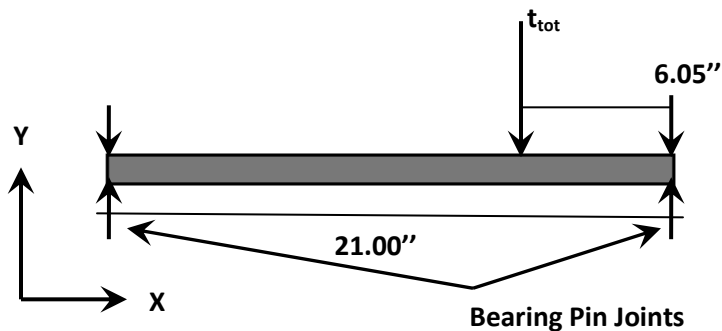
Free body diagram of shaft A. Arrows indicate location of loads and bearing joints [3].
